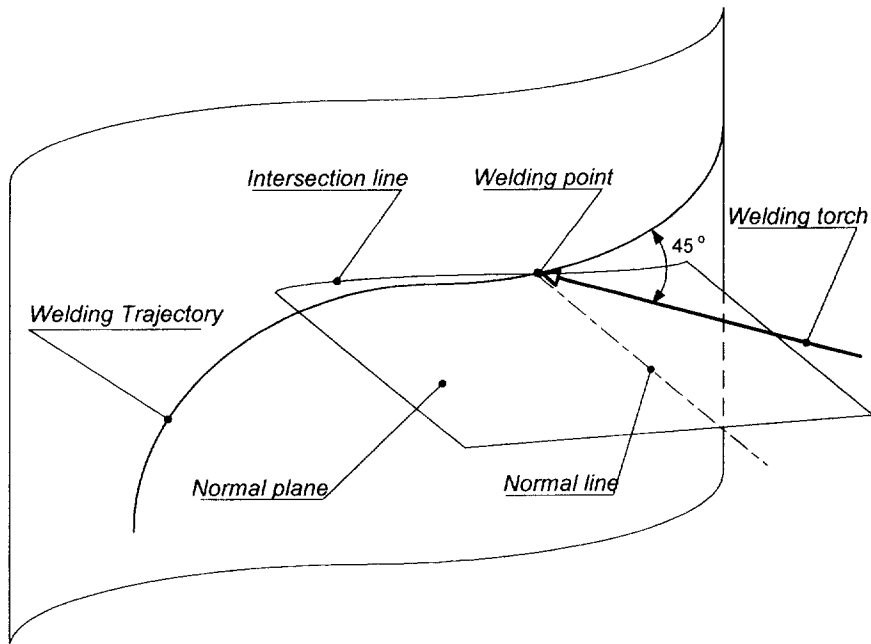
Geometric illustration for the requirement of 3D welding task
